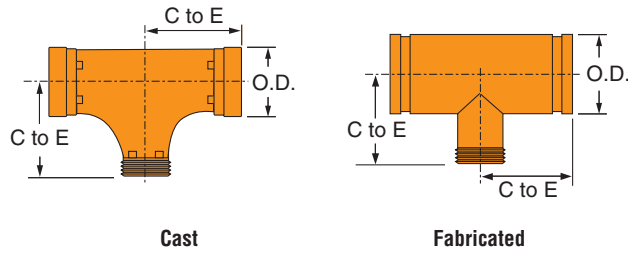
REDUCING TEE WITH THREADED BRANCH
